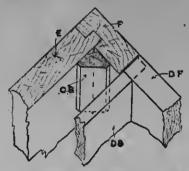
Front Corner Joint and Drawer of Combined Fitment.
